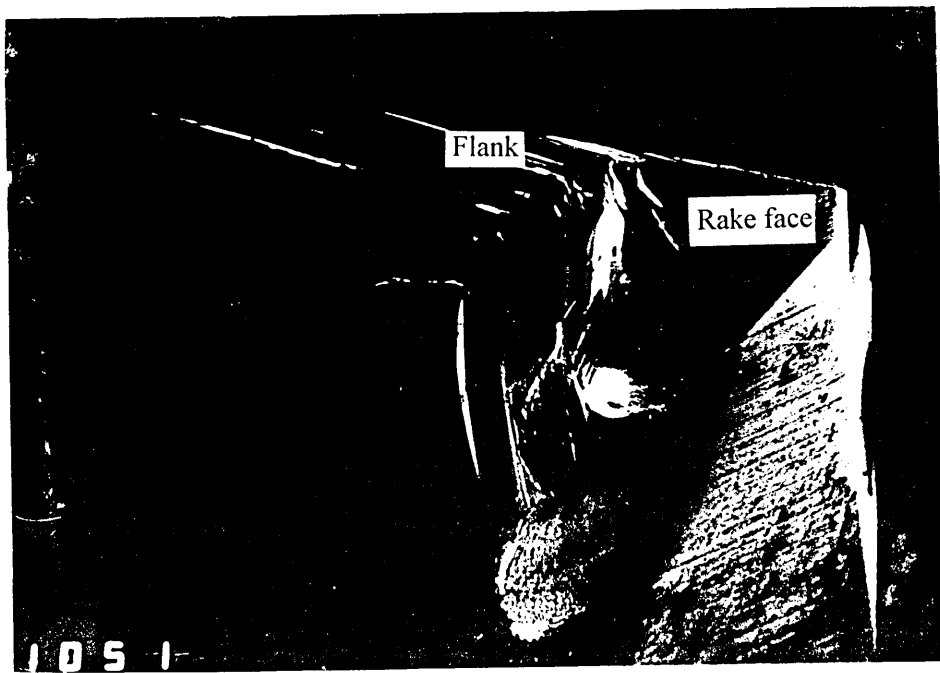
The breakage produced on the top of finishing tooth when sawing mild steel with segment type A1
